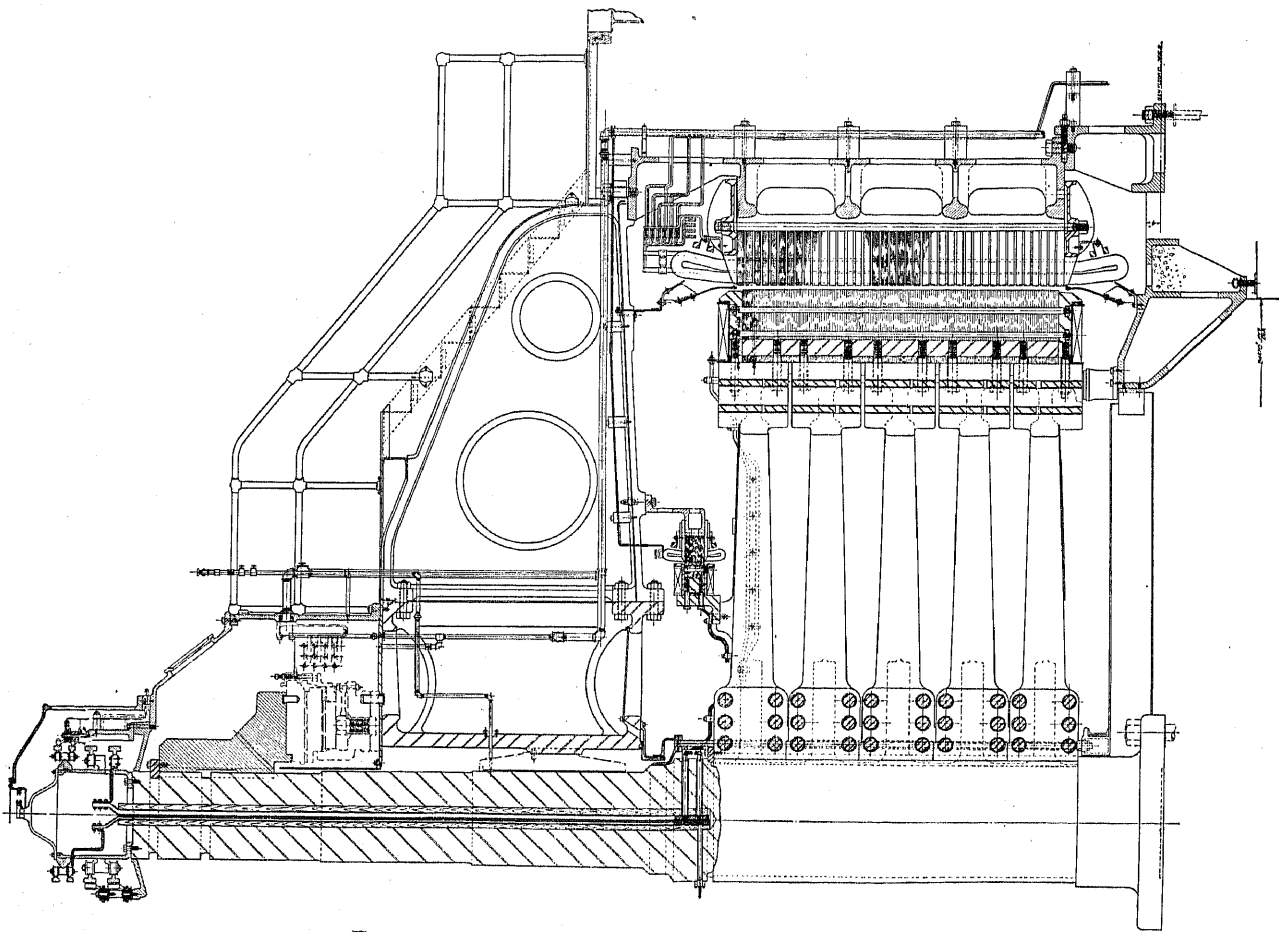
CROSS SECTION OF ASSEMBLED GENERATOR
